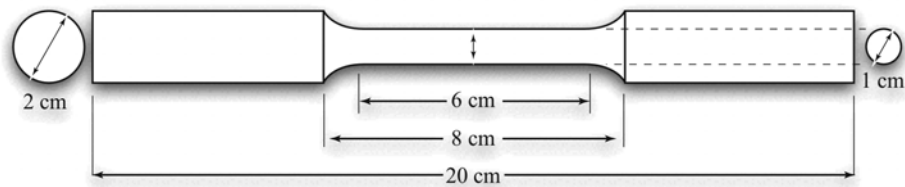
Pattern dimensions for round cast to shape and size tensile test bar
